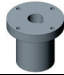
Radius Circuit mounting kit for WEG EC motor – 300 833 001
